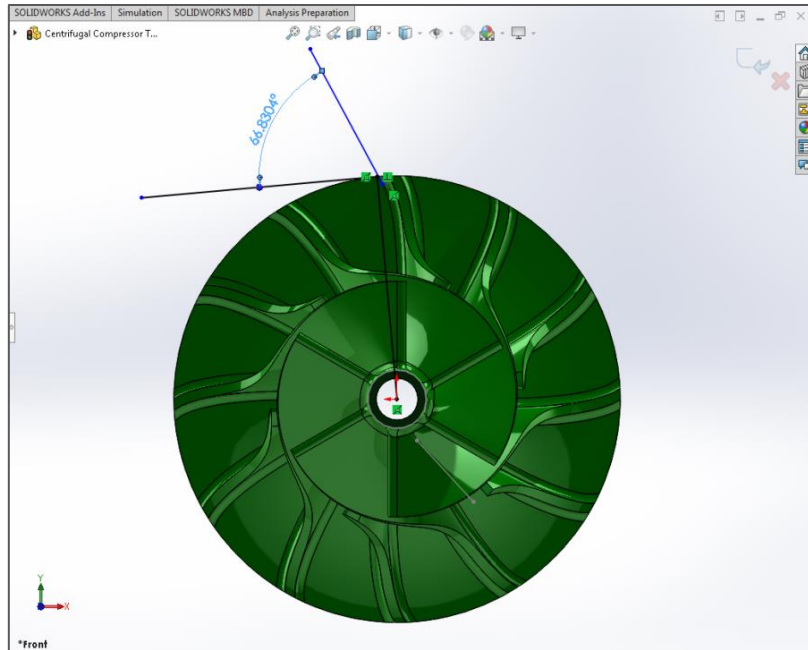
Compressor Exit Blade Angle Definition using SolidWorks
